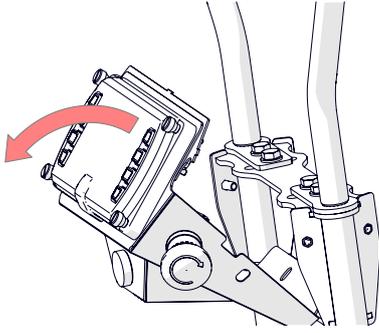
E - Gently lower the whole console cover, supported by the electrical wires (wiring not shown).
